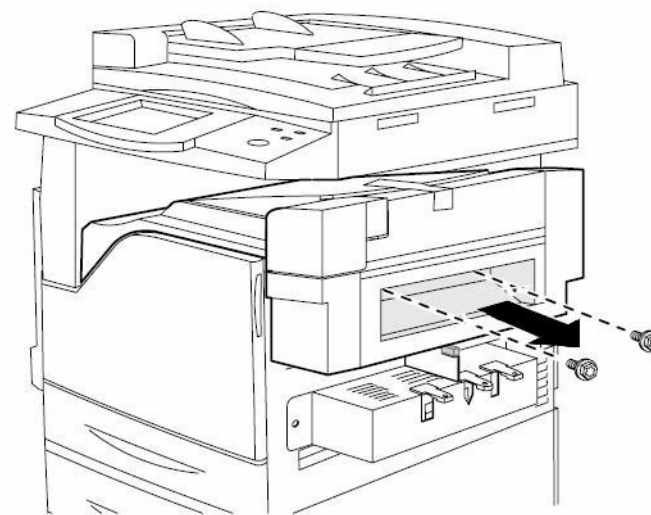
Removing Finisher H-Transport Assembly screws (2)
